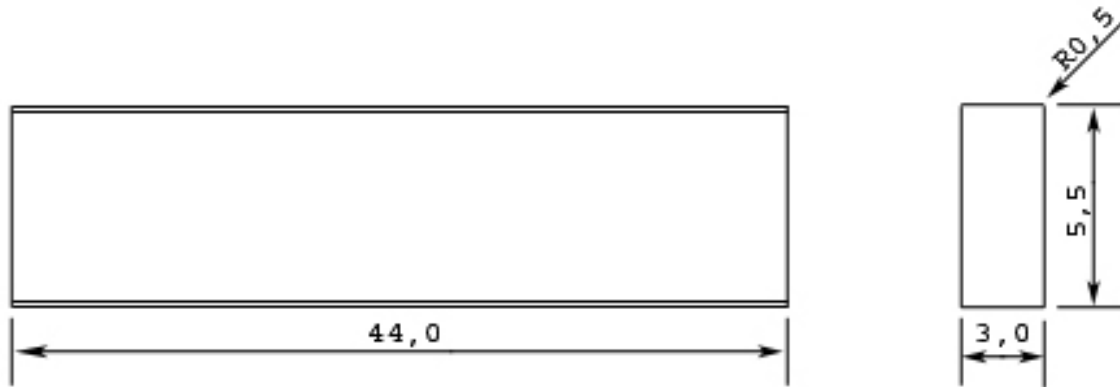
Geometry of bending fatigue specimens. Dimensions of samples as sintered condition. Units are in millimetres.
